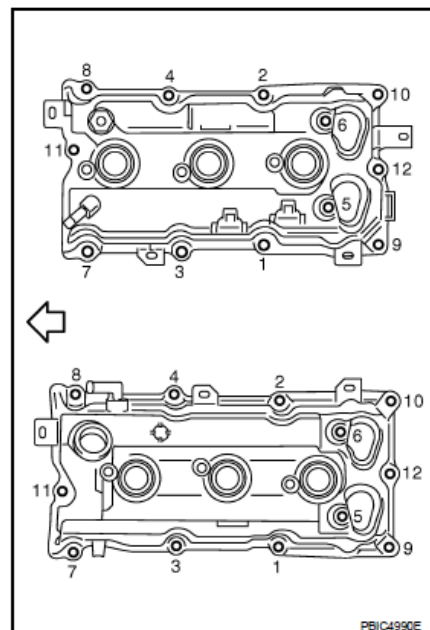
Identifying Mounting Bolts Tightening Sequence
